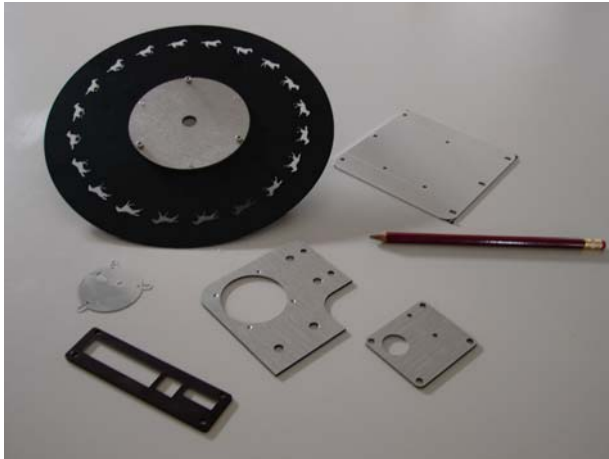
Cut samples include: 1.2 mm aluminium sheet, 0.2 mm tinned steel sheet 0.5 mm & 2.0 mm anodised aluminium courtesy of Newson Engineering NV.
